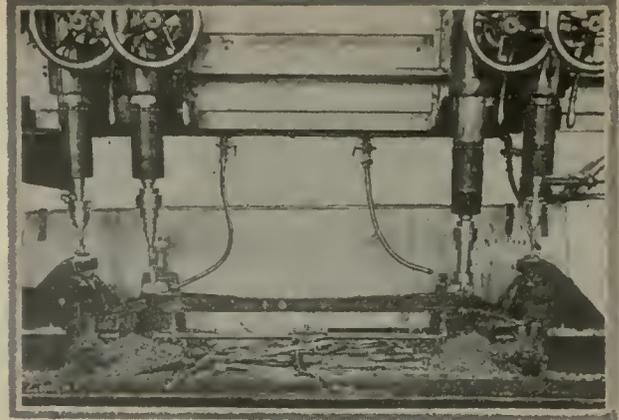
DRILLING, REAMING AND FACING FRONT AXLE.
